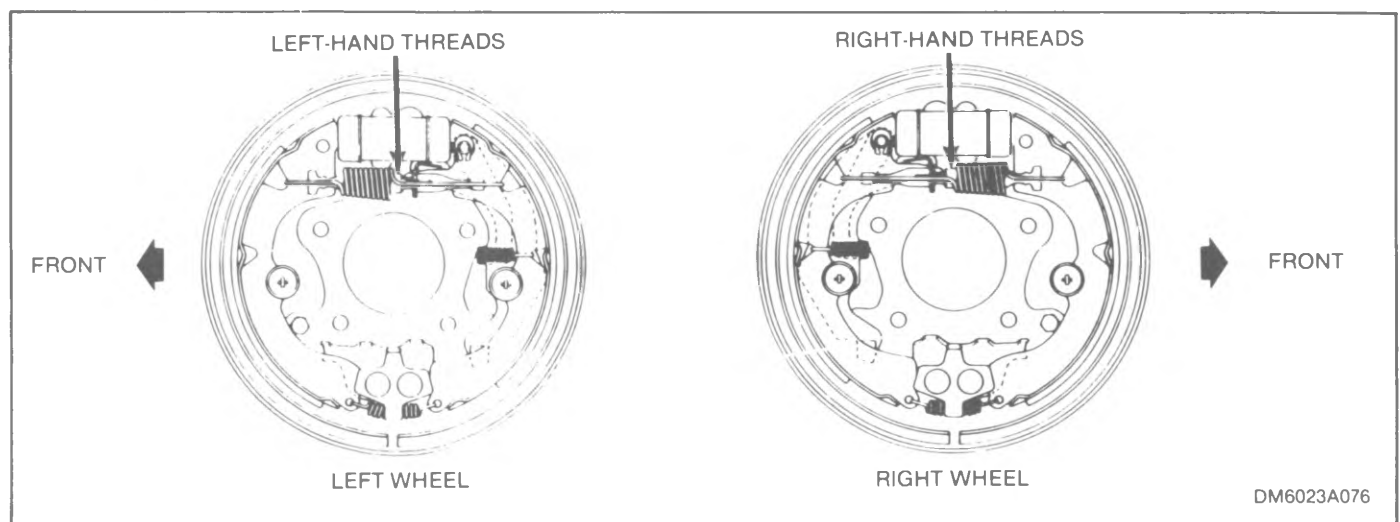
Left Hand and Right Hand Brake Assemblies
